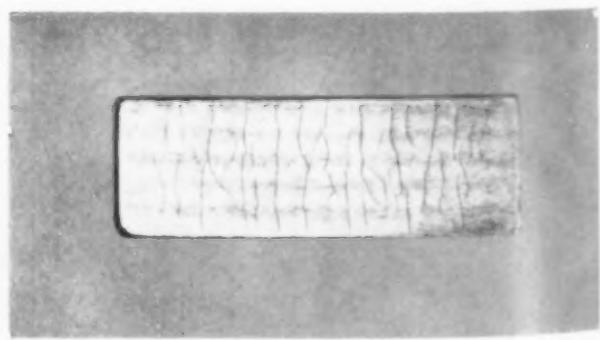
Above are shown surface cracks in hardened steel which has been ground too severely. Cracks are perpendicular to the grinding direction, shown by faint burn marks.
